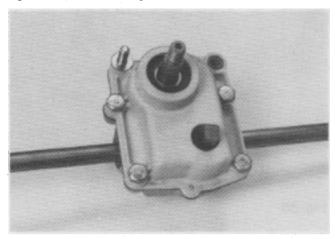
Run all four nuts on short bolts up snug against housing. Fig. 71.
